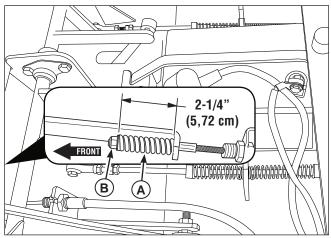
Parking Brake Adjustment A. Brake Spring B. Adjustment Nut
